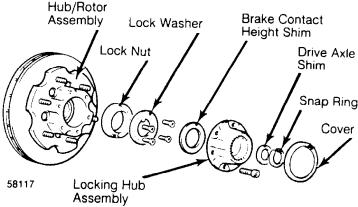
Exploded View of Automatic Locking Hub Courtesy of Chrysler Motors.
